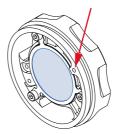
Position to cut off the thread plug on the backside of the mount adapter.
